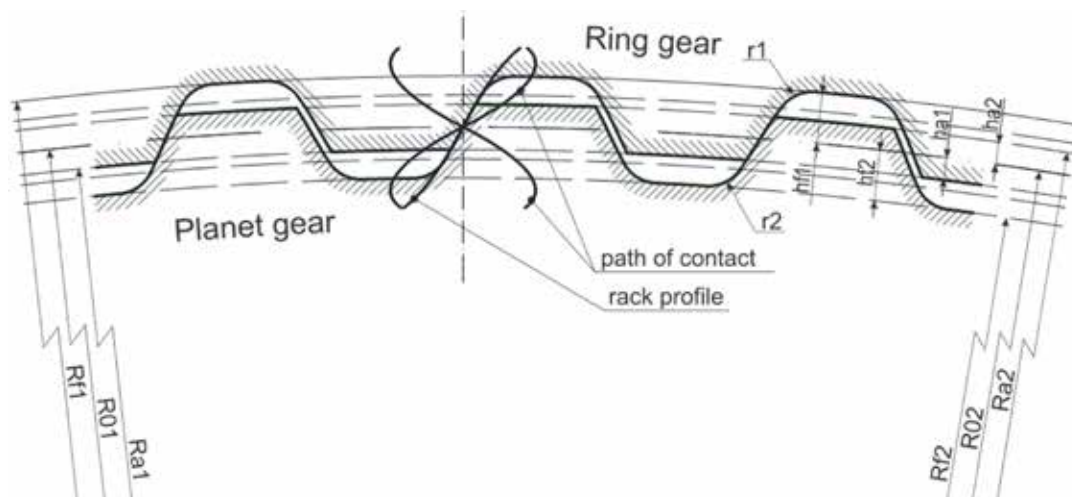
S-gear flank geometry of the planocentric gear box [15].
